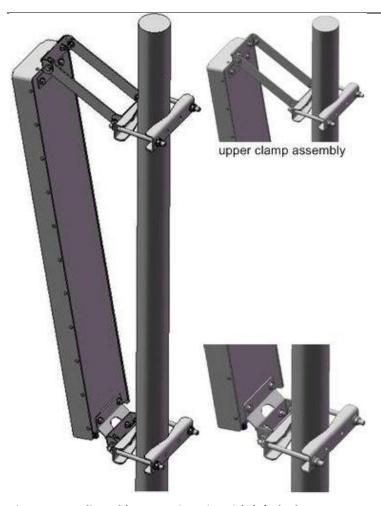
Adjustable Mounting Kit, with 'V' Blocks
